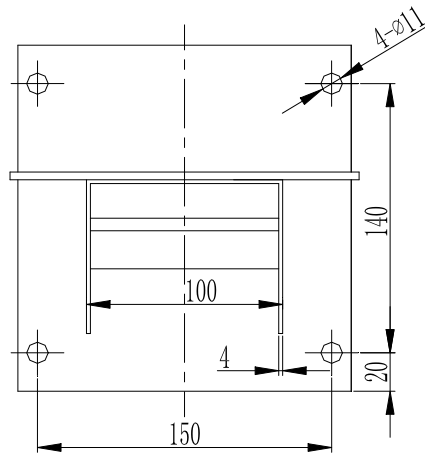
Dimension of Wall-mounted Bracket
